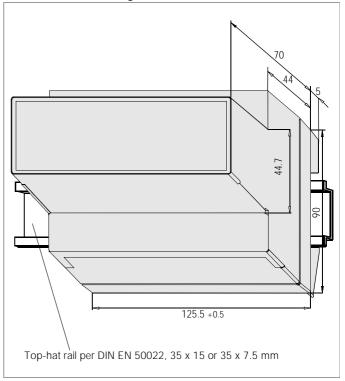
Dimensional Drawing for Top-Hat Rail Mounting (front and side view)
